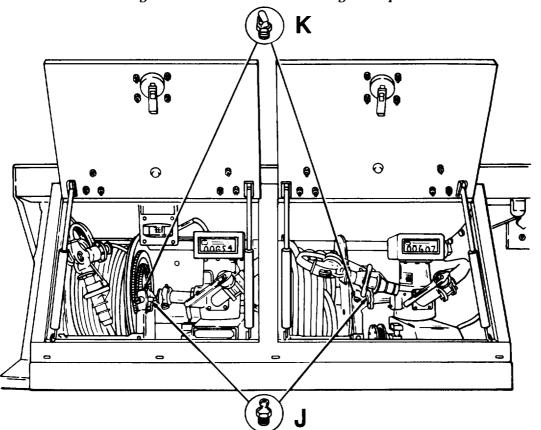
Location of Hose Reel Hand Crank and Hose Reel Side Bearing Lubrication Points (M969 and M969A1).
